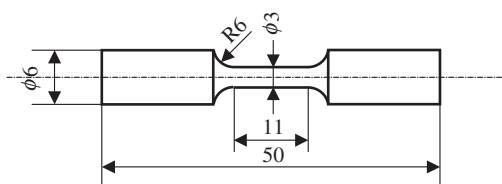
Schematic drawing of dog born type specimens for tensile tests in mm.
